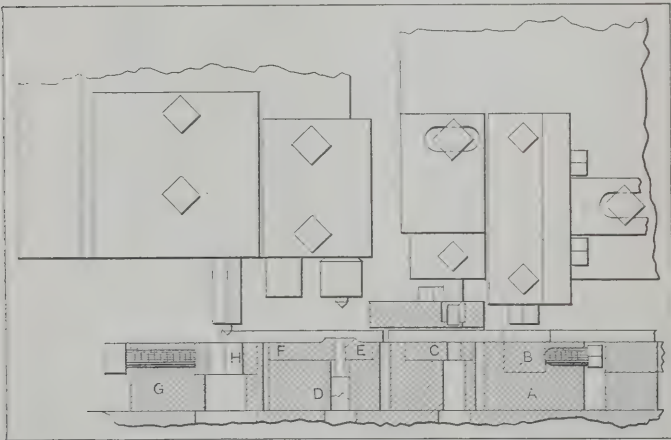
Sectional View of Dies and Punches for Making Nuts
